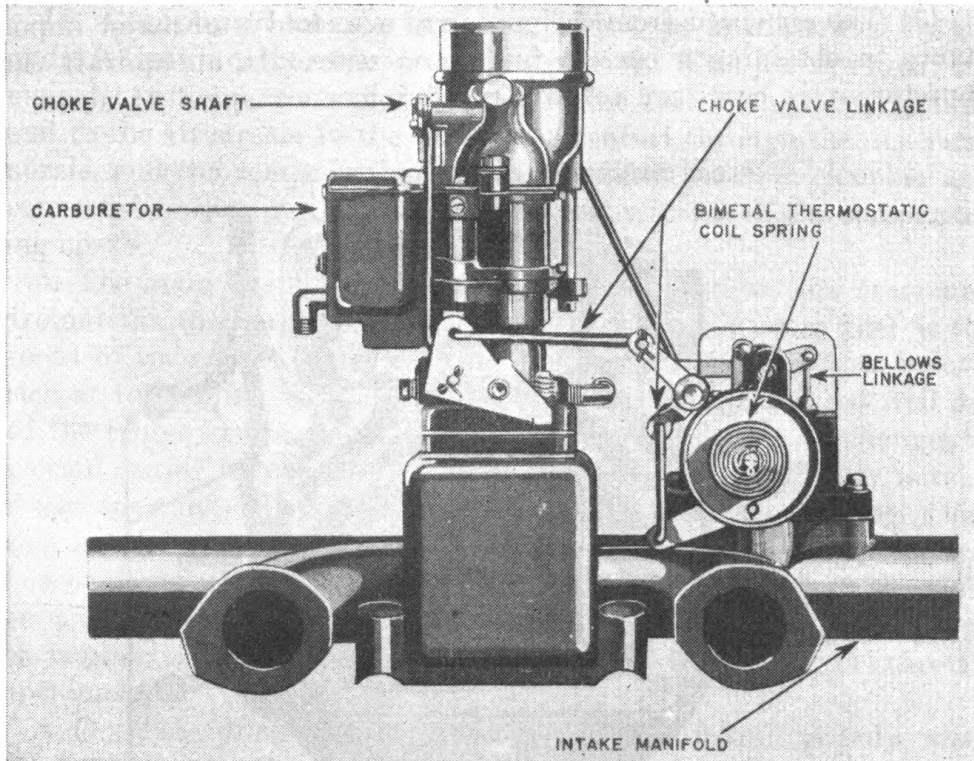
Automatic choke mechanism mounted on intake manifold and connected to the carburetor.
